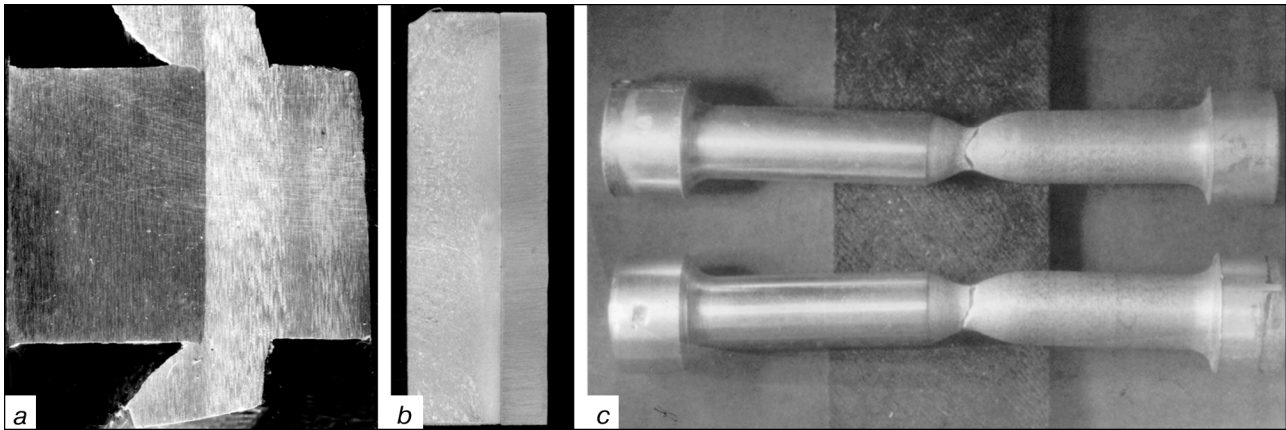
Joint produced by conventional friction welding using forming devices: *a* — general view; *b* — macrostructure ($\times 4$) (reduced by 3/5); *c* — after tensile tests
